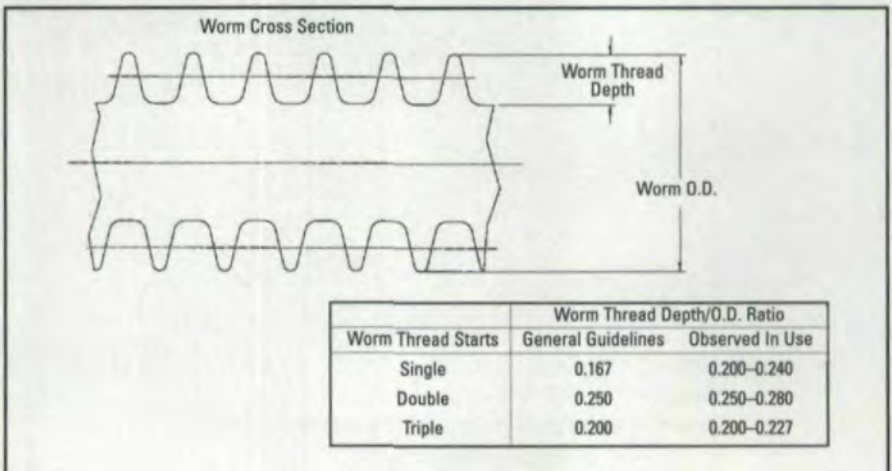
Rolled worm thread depth and outside diameter guidelines.
